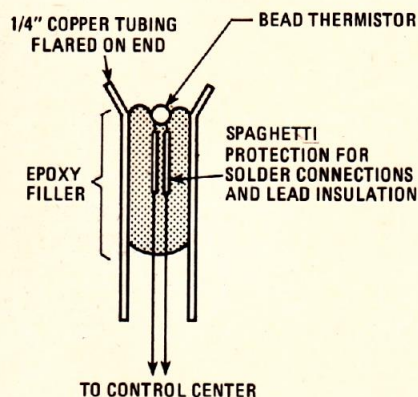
CUTAWAY DRAWING of thermistor probe. See text for construction details.
